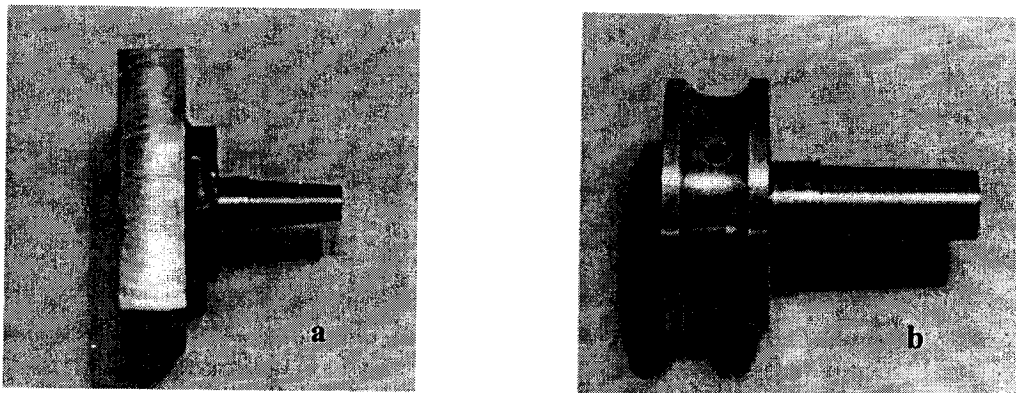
Side view of end fittings, fixed end (a); rotating end (b)
